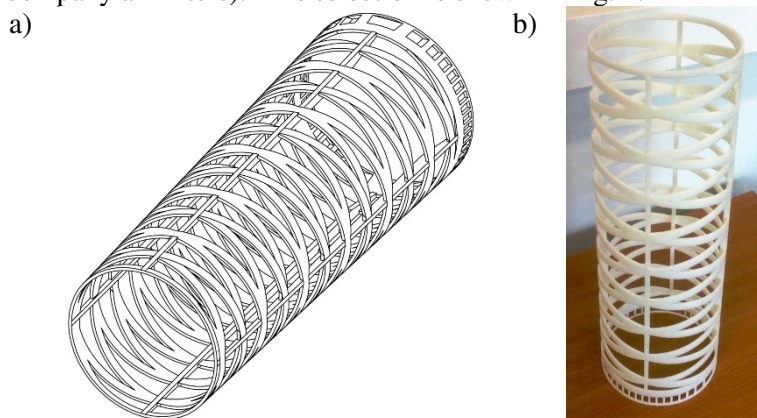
New design inner liner element: a – 3D model; b – printed model
